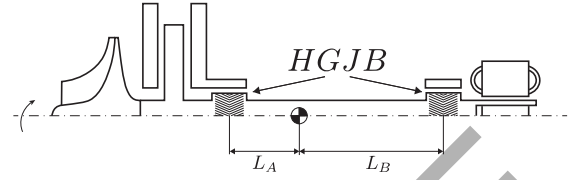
VISUALIZATION OF THE TURBOCOMPRESSOR SUPPORTED BY HERRINGBONE GROOVED JOURNAL BEARINGS.
